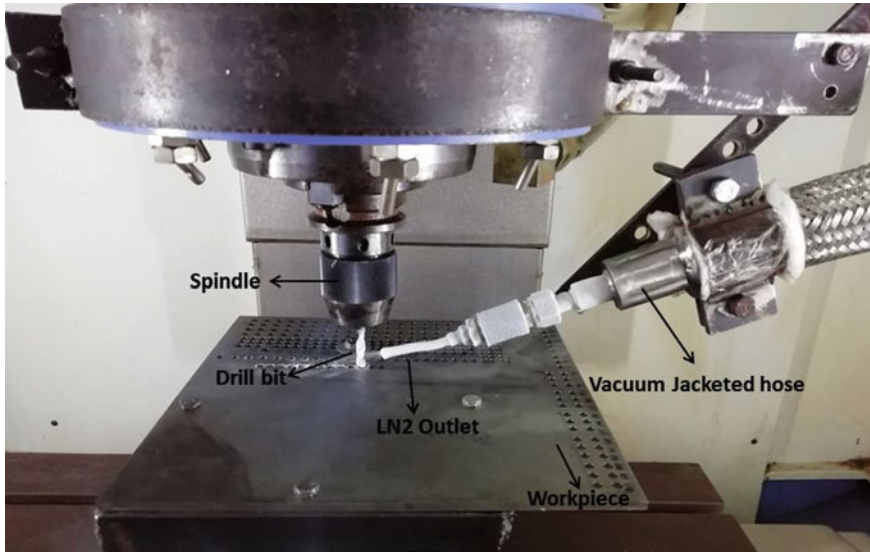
Set-up used at manufacturing workshop of IITRAM for drilling of Ti6Al4V in VMC machine
